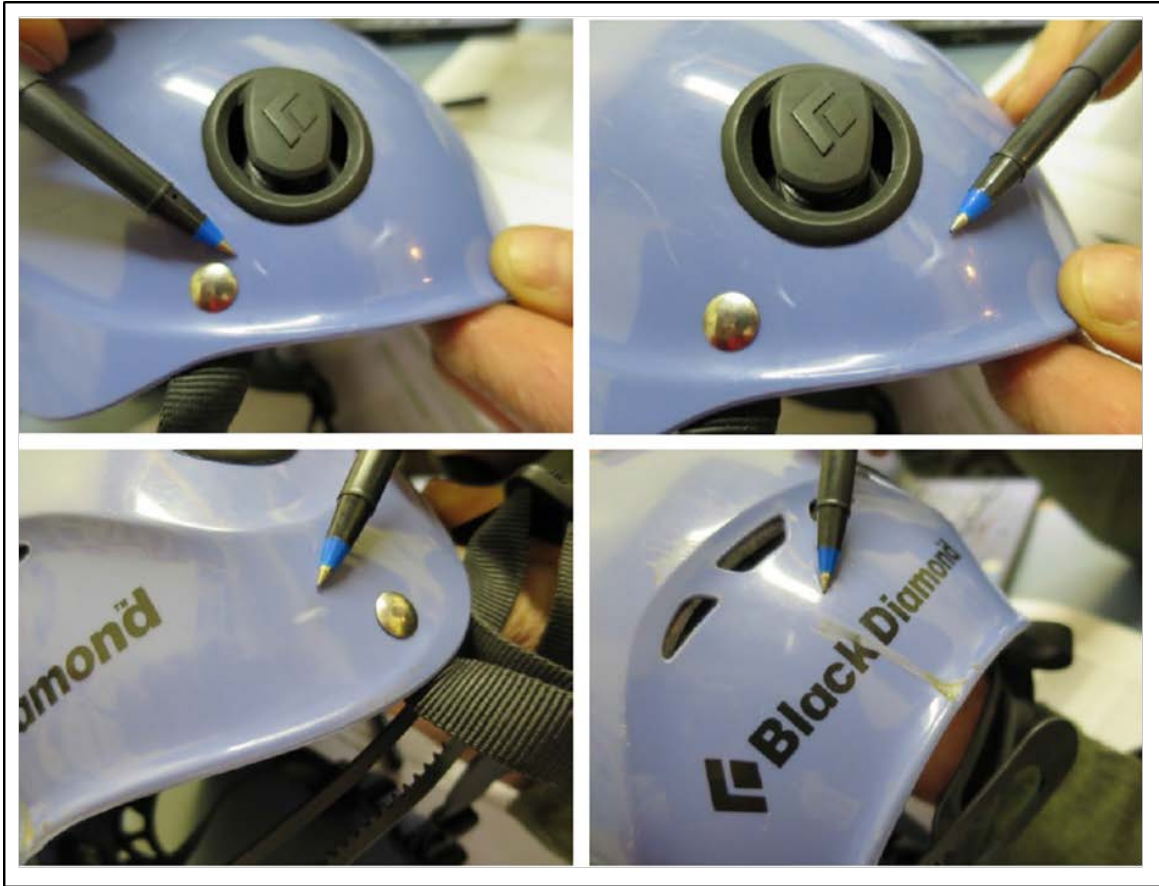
Visual inspection and dimensional inspection of the ABS shell on mishap helmet (Tab CC-40 thru CC-41)
